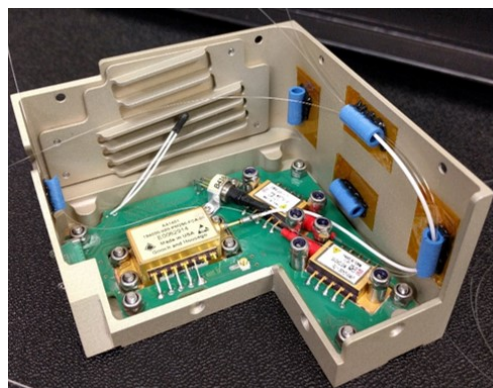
Photo of the fitted CubeCAT PCB ready for optical network assembly.
